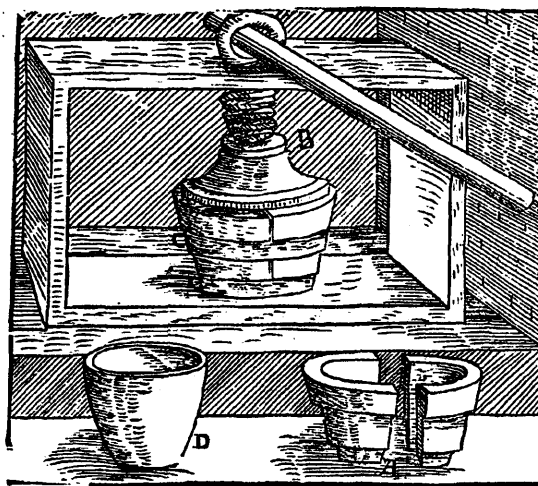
Mould and press for making crucibles, according to Lazarus Ercker (Sisco and Smith 1951: 181, fig. 26). A: The lower part of the wooden mould; B: The entire mould, showing the crucible shaped under the press; C: Iron hoop; D: Finished crucible.
